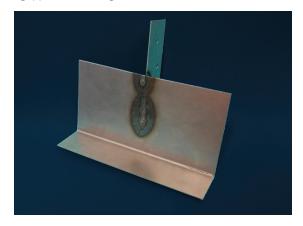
Prototype of Gripper2; constructed from a sheet of metal of 1,5 [mm]. Dimensions: 250 by 125 [mm]. The rib is 50 [mm]. For Gripper3 the rib is 100 [mm].
